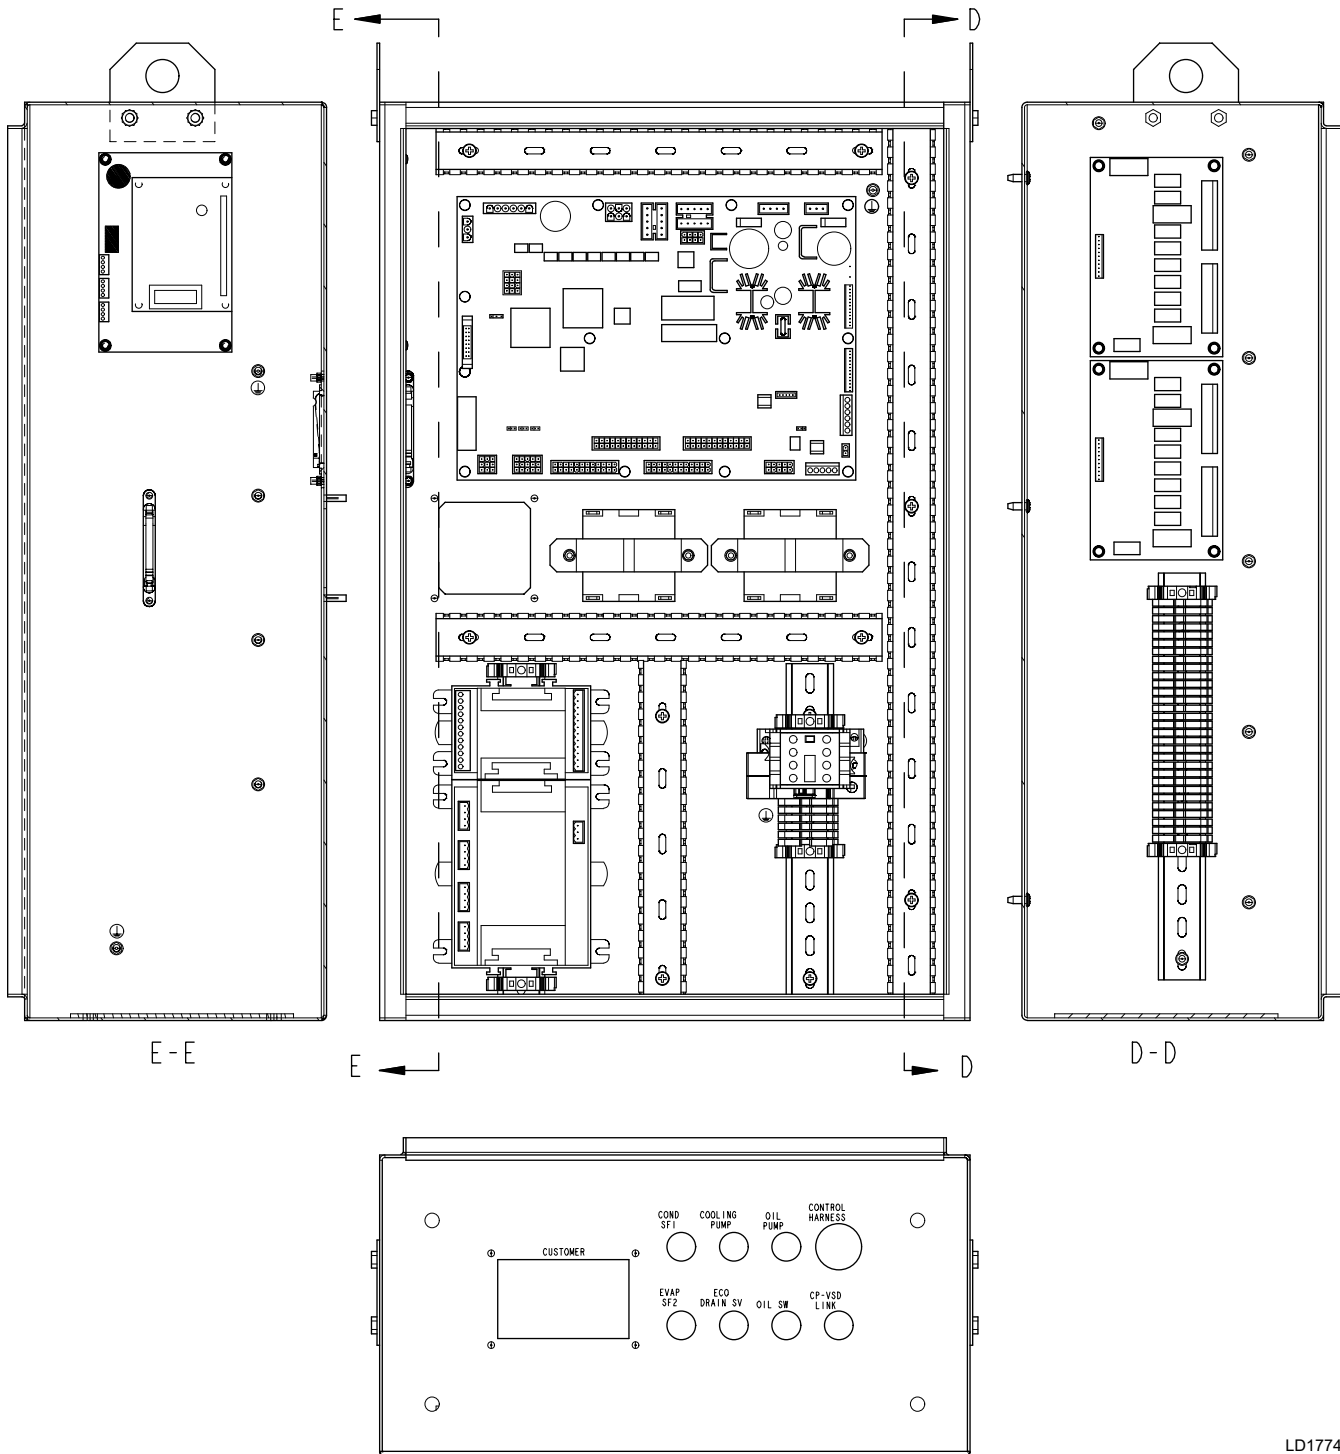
PANEL WIRING - VYPER DRIVE - 380/60HZ - FRAME B (CONT'D)
